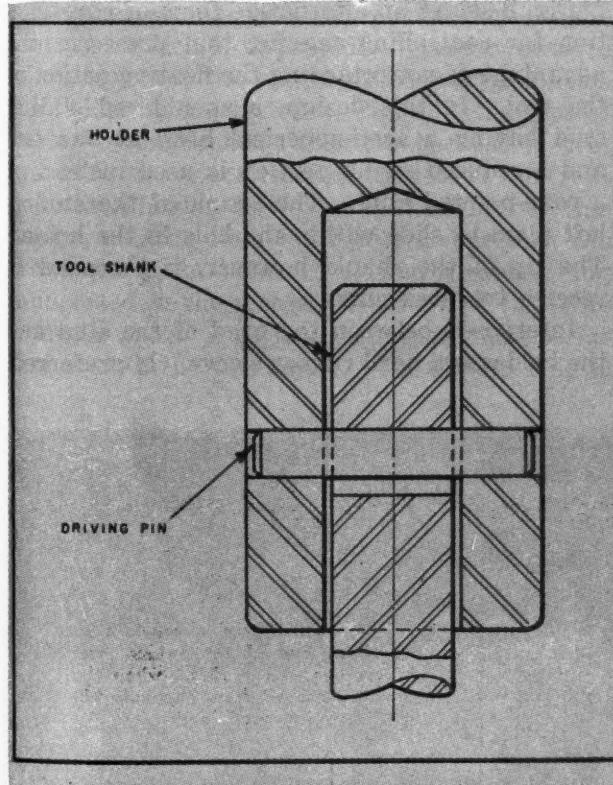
A common type of floating tool-holder in which the amount of float is controlled by the clearance between the tool shank and holder, and between the driving pin and hole in the tool shank
